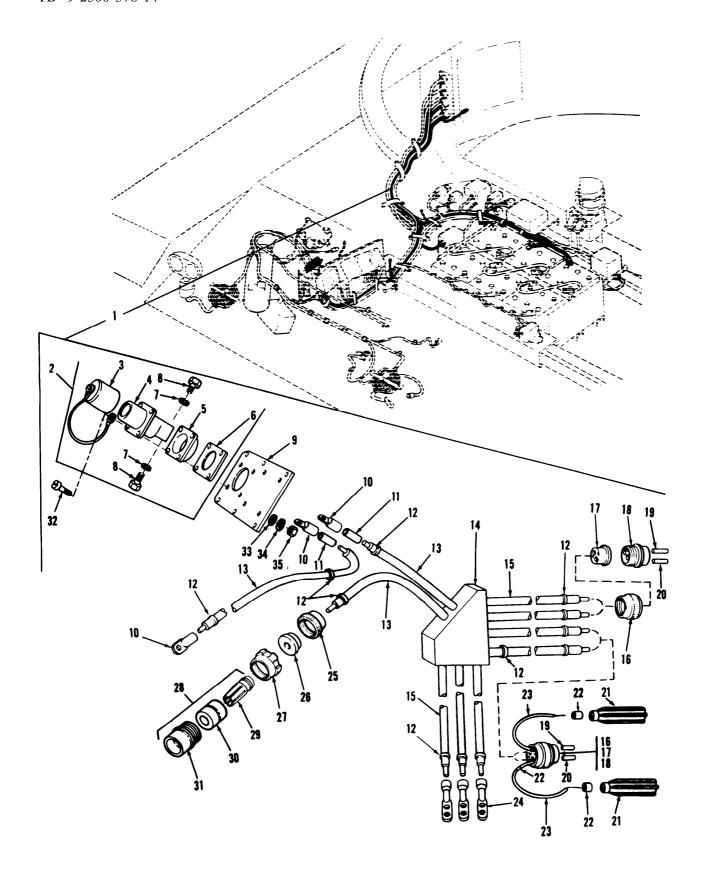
BATTERY SLAVE AND STARTER RELAY CABLE ASSEMBLY (2CA ENGINE).
